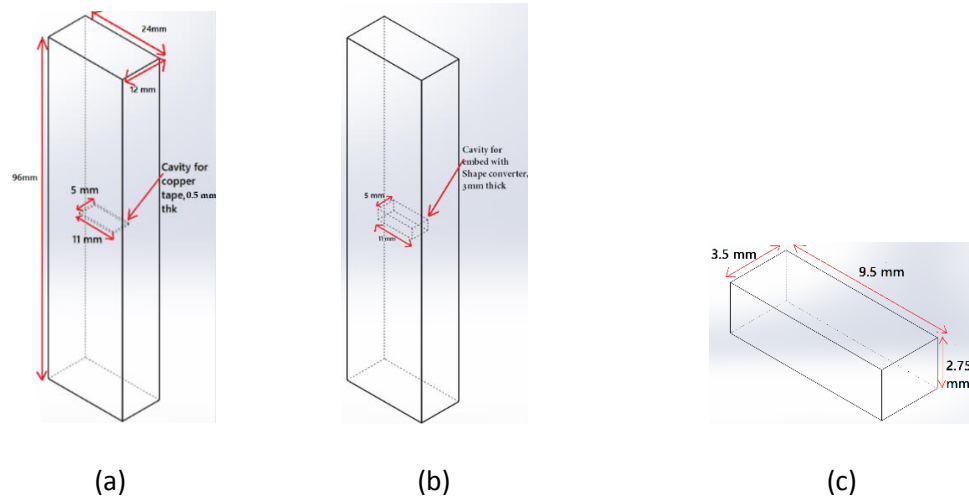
Specimen design for copper tape embed (a), and shape converter embed (b), with the dimensions of shape converter shown in (c).
